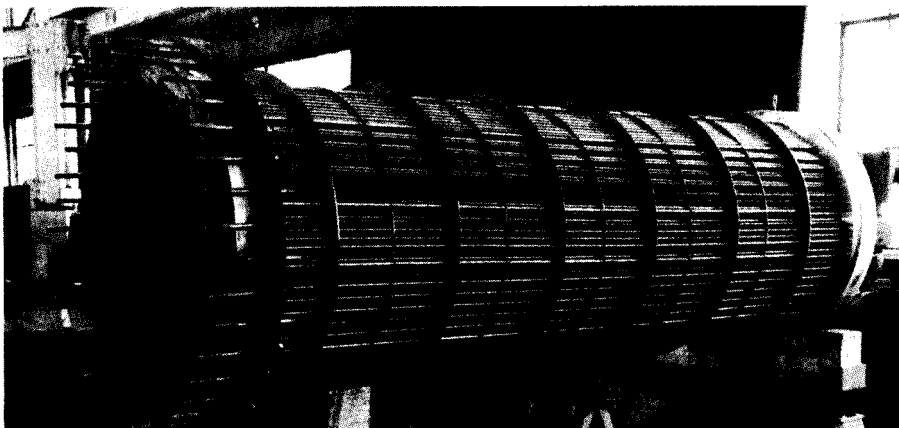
Lube oil cooler tube bundle showing disk and donut baffle arrangement
